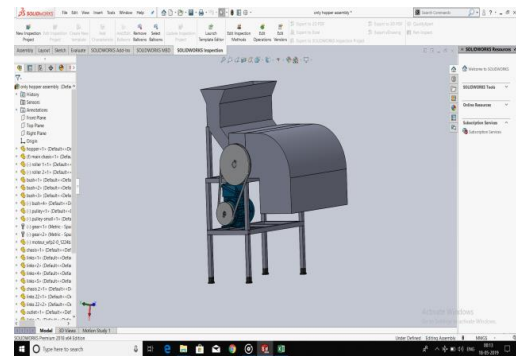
Front View of the Final Ginning Machine (Cad Model)
